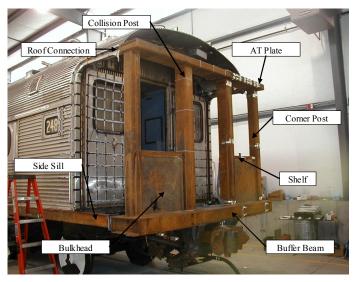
A Photograph of the Fabricated SOA End Frame Design
